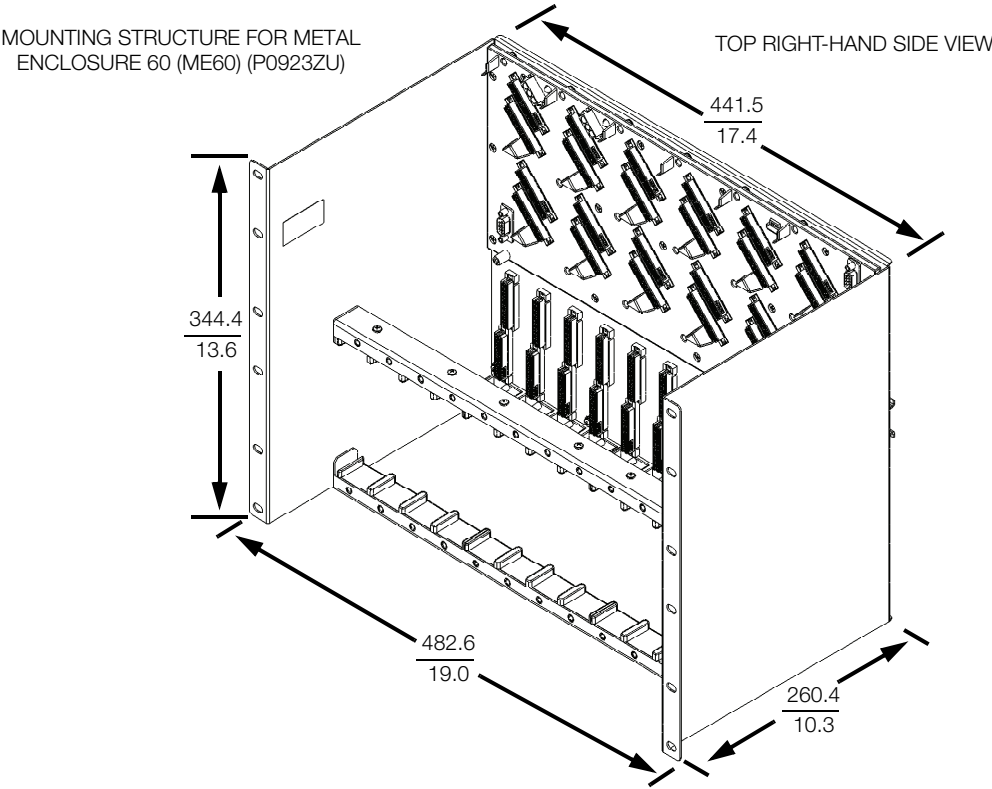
Dimensions - Mounting Structure for Metal Enclosure 60 (P0923ZU)
